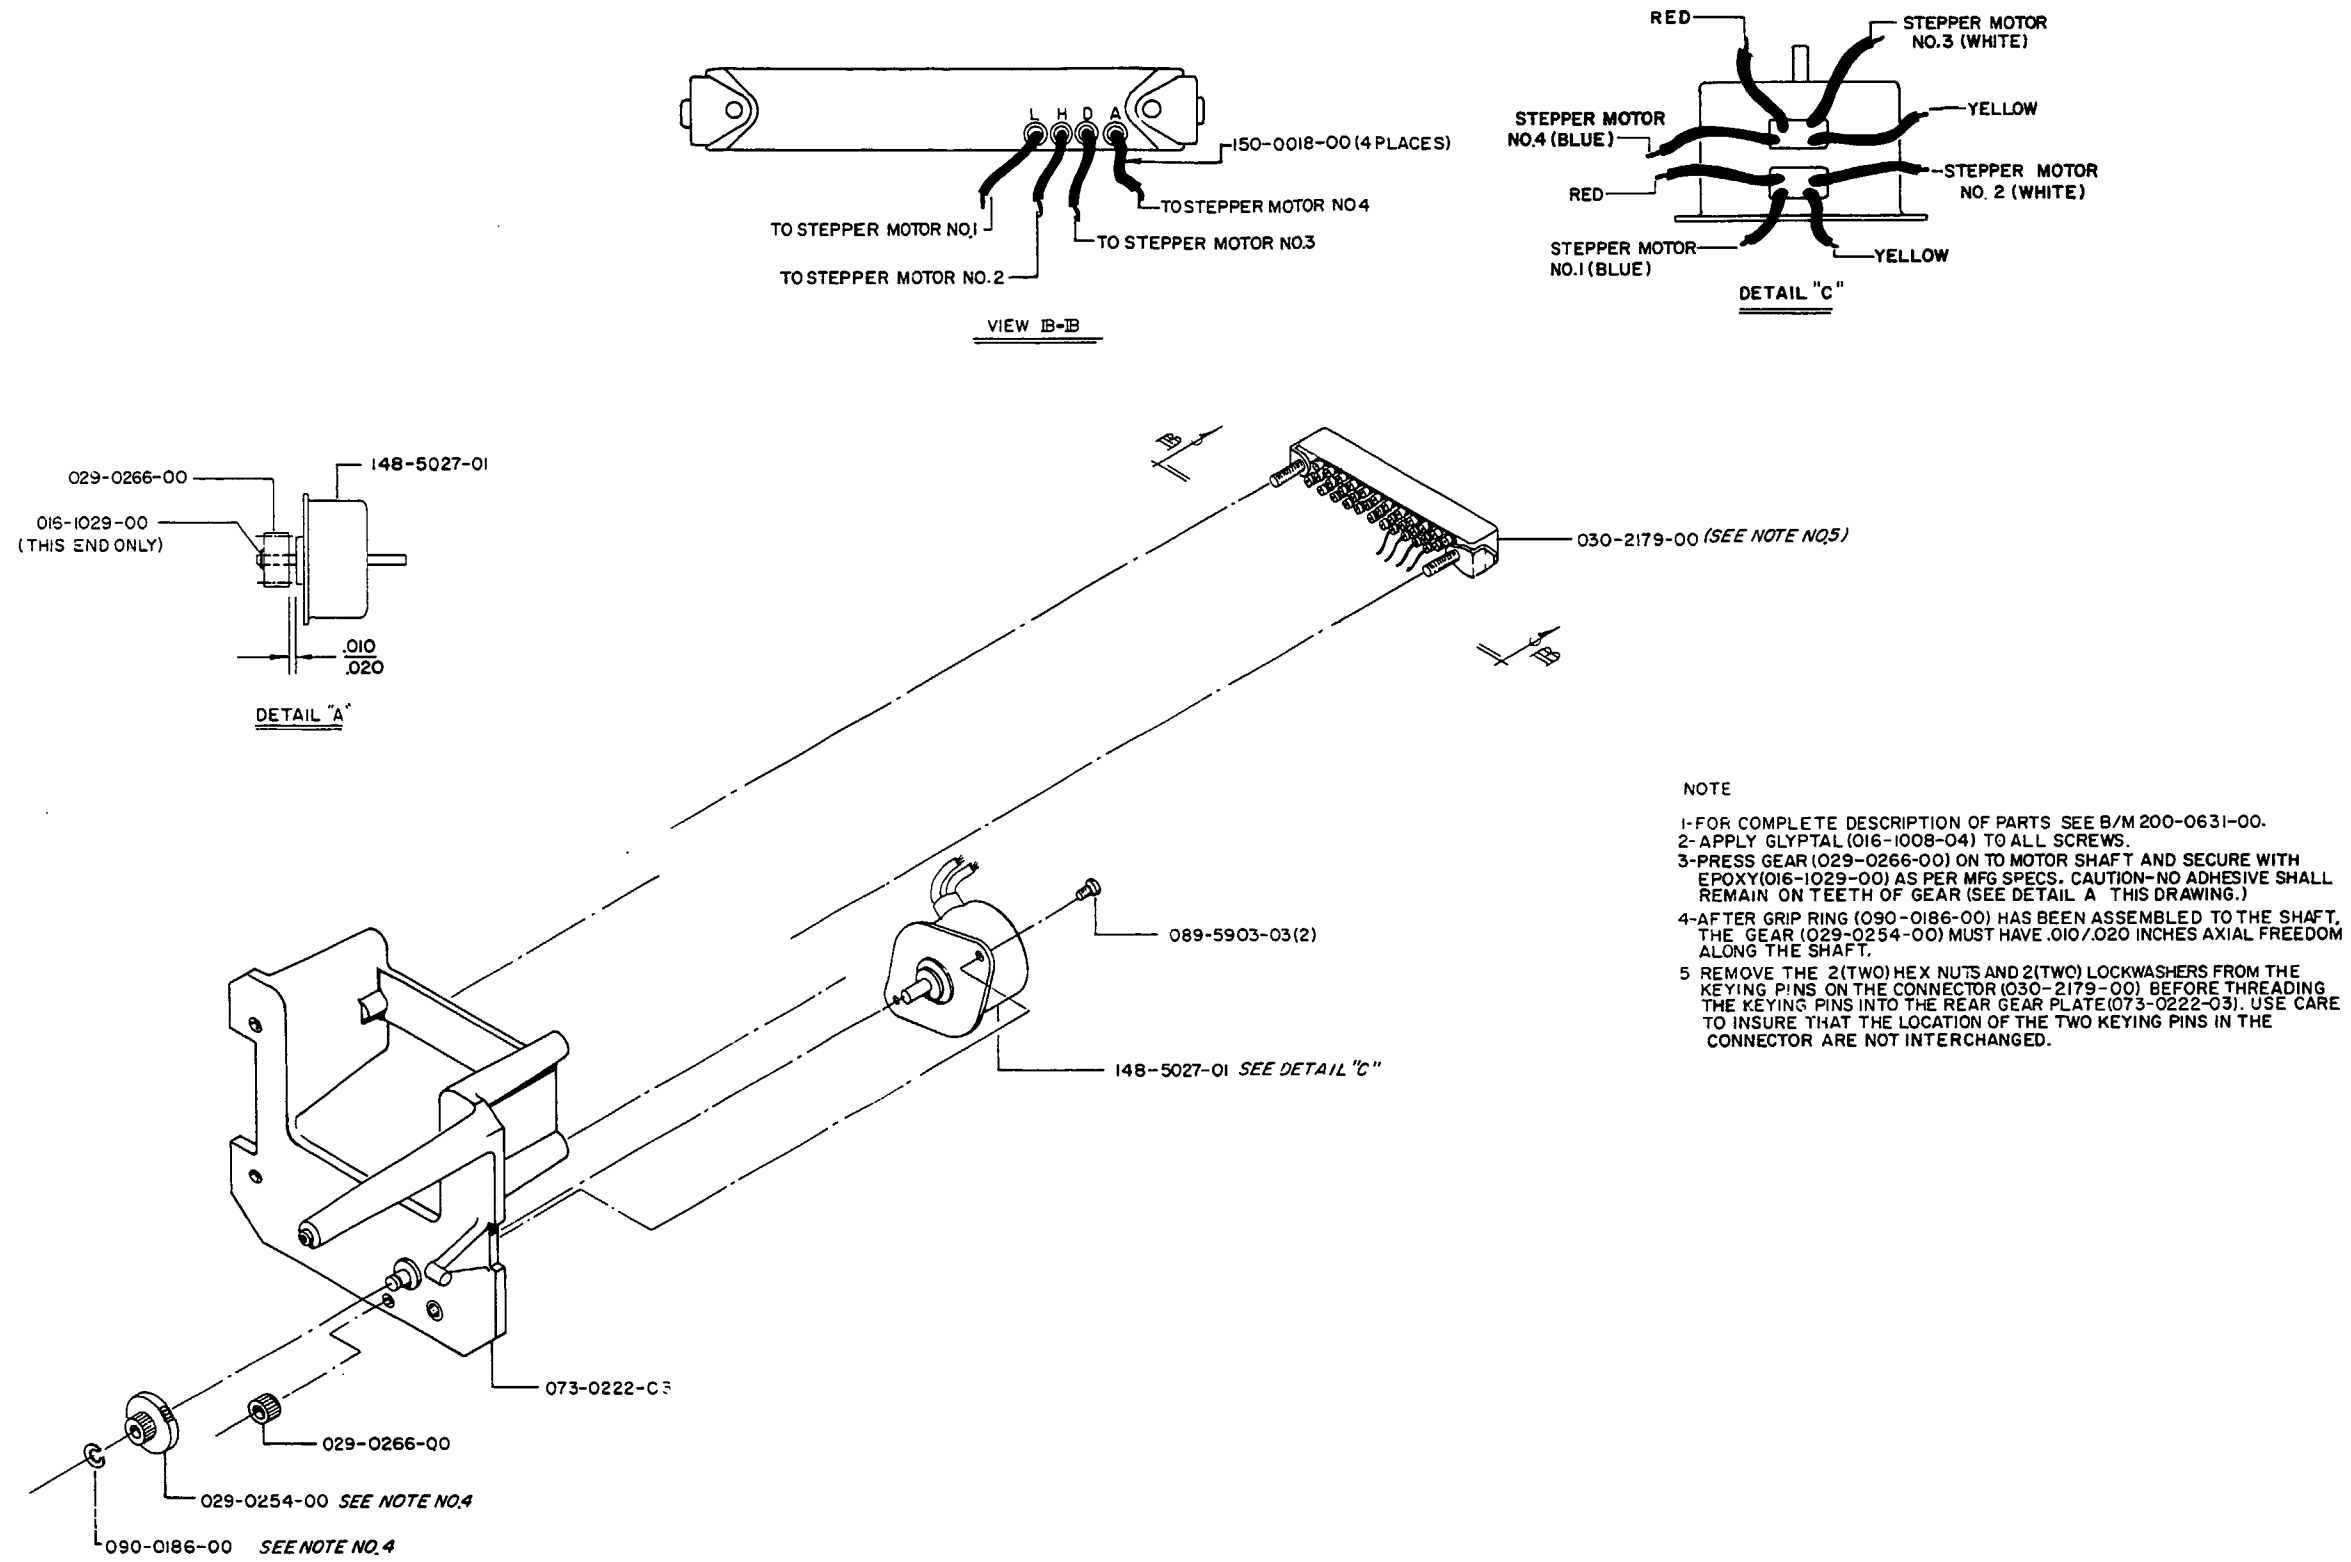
A KI 525 REAR PLATE ASSEMBLY
